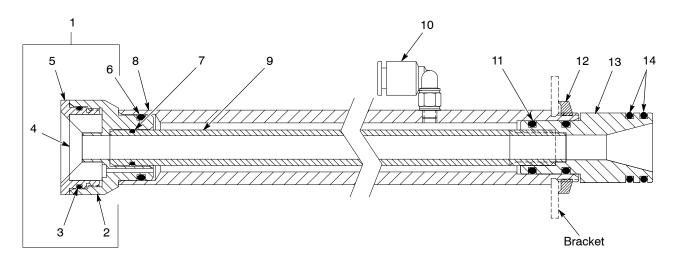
O-Ring Fit Fluidizing Pick-Up Tube Kit
